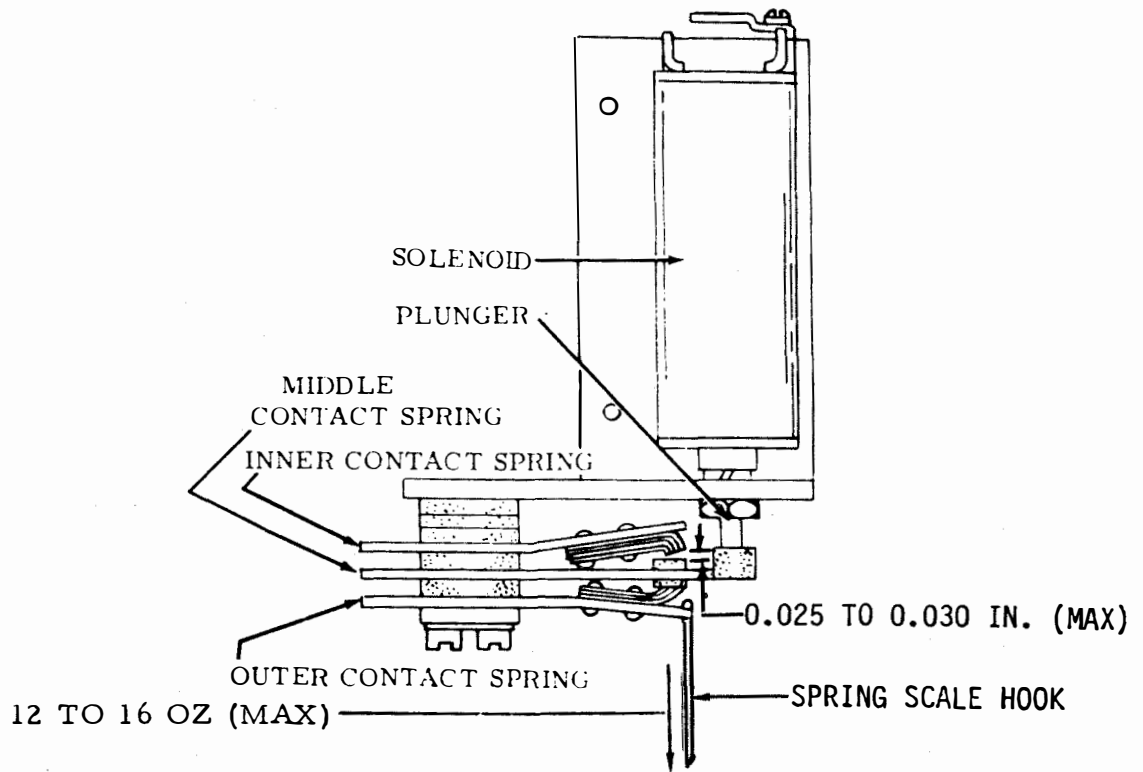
Outer Contact Spring and Inner Contact Spring Gap
